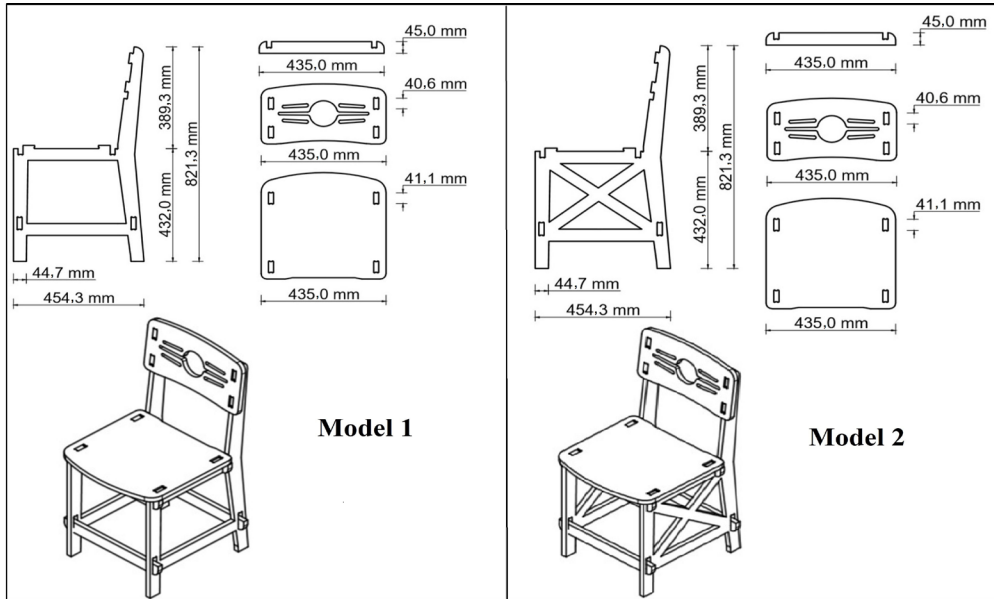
Technical drawings and dimensions of the (a) Chair Model 1 and (b) Model 2.
